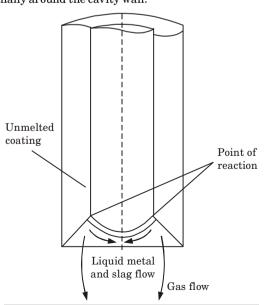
Slag metal reaction in SMA welding.
